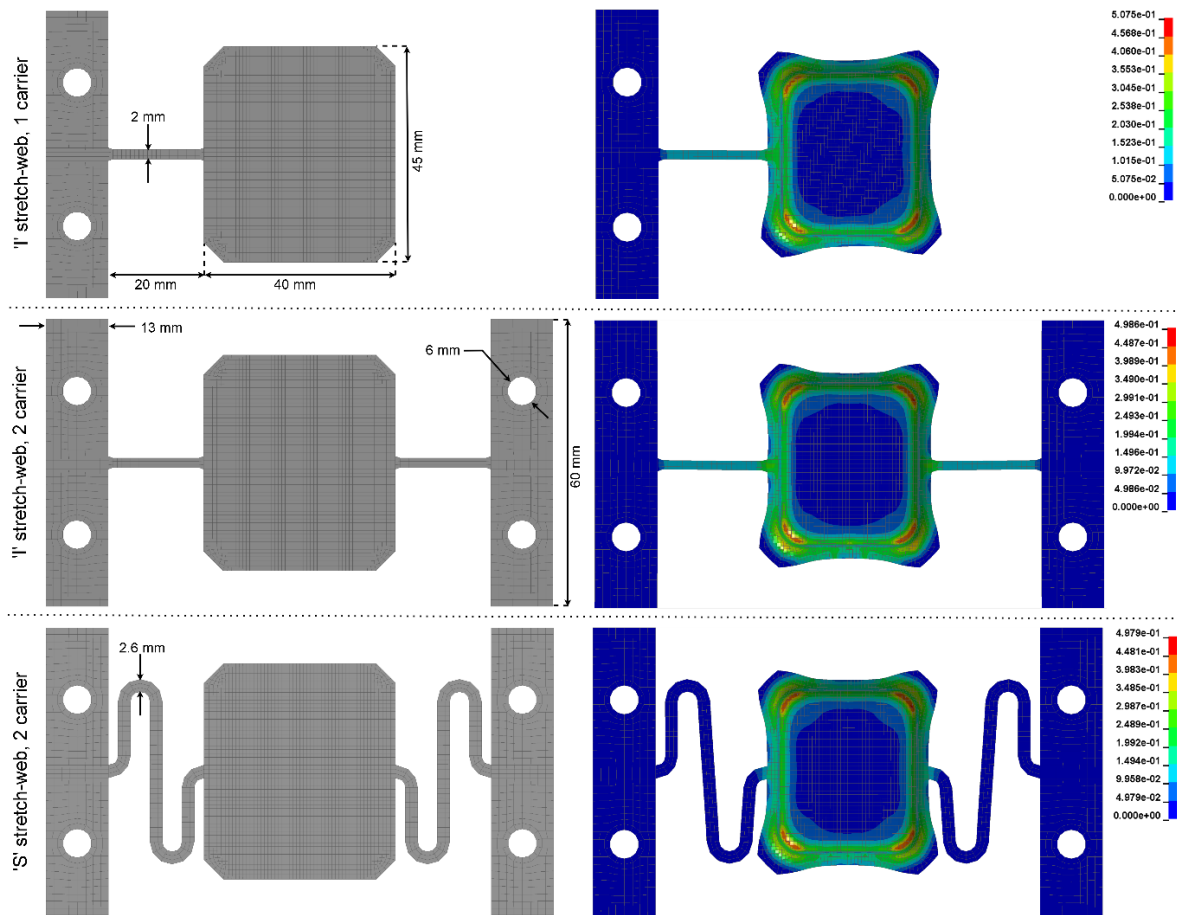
Strip layouts used in 'Single Work-Piece' model with (left) blanked work-pieces and (right) effective plastic strain of formed parts with a draw depth of 6 mm.
